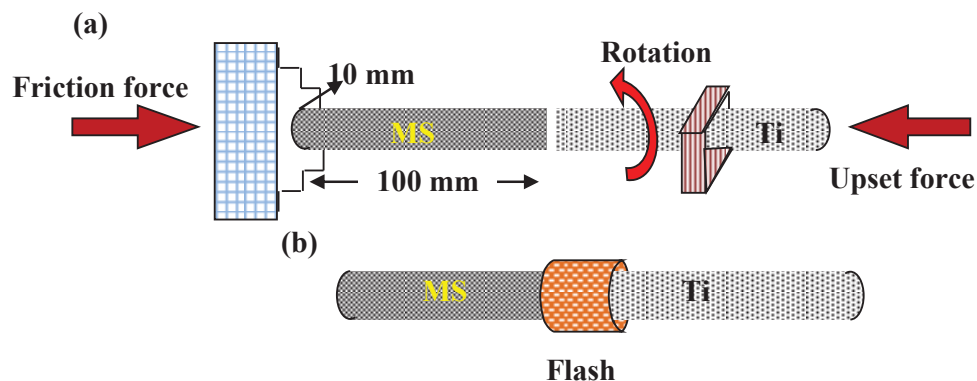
Schematic of (a) friction welding process and (b) friction joint after machining
